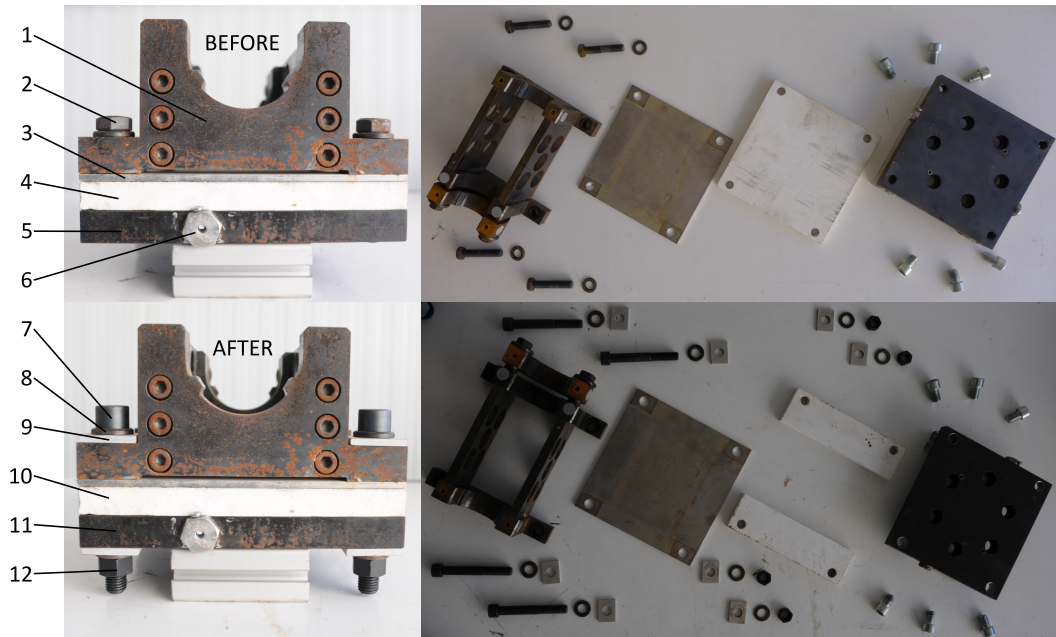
Changes to dynamo-meter bearing due to improved insulation: top - before, bottom - after insulation. Parts: 1) Fix bearing (floating bearing on other side); 2) hexagon bolt ISO4017 - M16x80 - 10.9; 3) stainless steel plate, $5 \times 230 \times 235 \text{ mm}$ with four 17.5 mm holes; 4) Promat MONOLUX-800 plate, $5 \times 230 \times 235 \text{ mm}$ with four 17.5 mm holes; 5) dynamo-meter connection plate, $23 \times 230 \times 235 \text{ mm}$ with four M16 screw threads; 6) One of two sockets for PT1000 temperature sensors; 7) bolt M16x110 - 10.9; 8) steel washer, later replaced through $4 \times 30 \times 40 \text{ mm}$ steel plates with 17.5 mm holes (not in photo, both sides); 9) insulation washer made from K-Therm®-AS 600M, $5 \times 30 \times 49 \text{ mm}$; 10) Promat MONOLUX-800 with plate, cut (compare picture on right); 11) dynamo-meter connection plate, $23 \times 230 \times 235 \text{ mm}$ with four 17.5 mm holes; 12) M16 nut, 12.9
